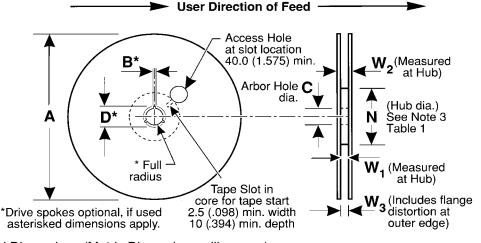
Reel Dimensions (Metric Dimensions will govern)
